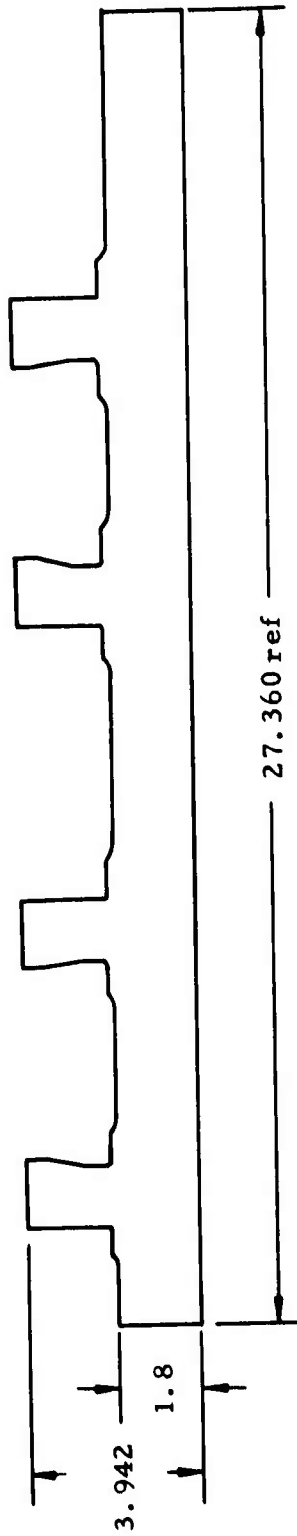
CROSS SECTION OF EXTRUDED SOLID SHAPE PER DRAWING NO. 900102
